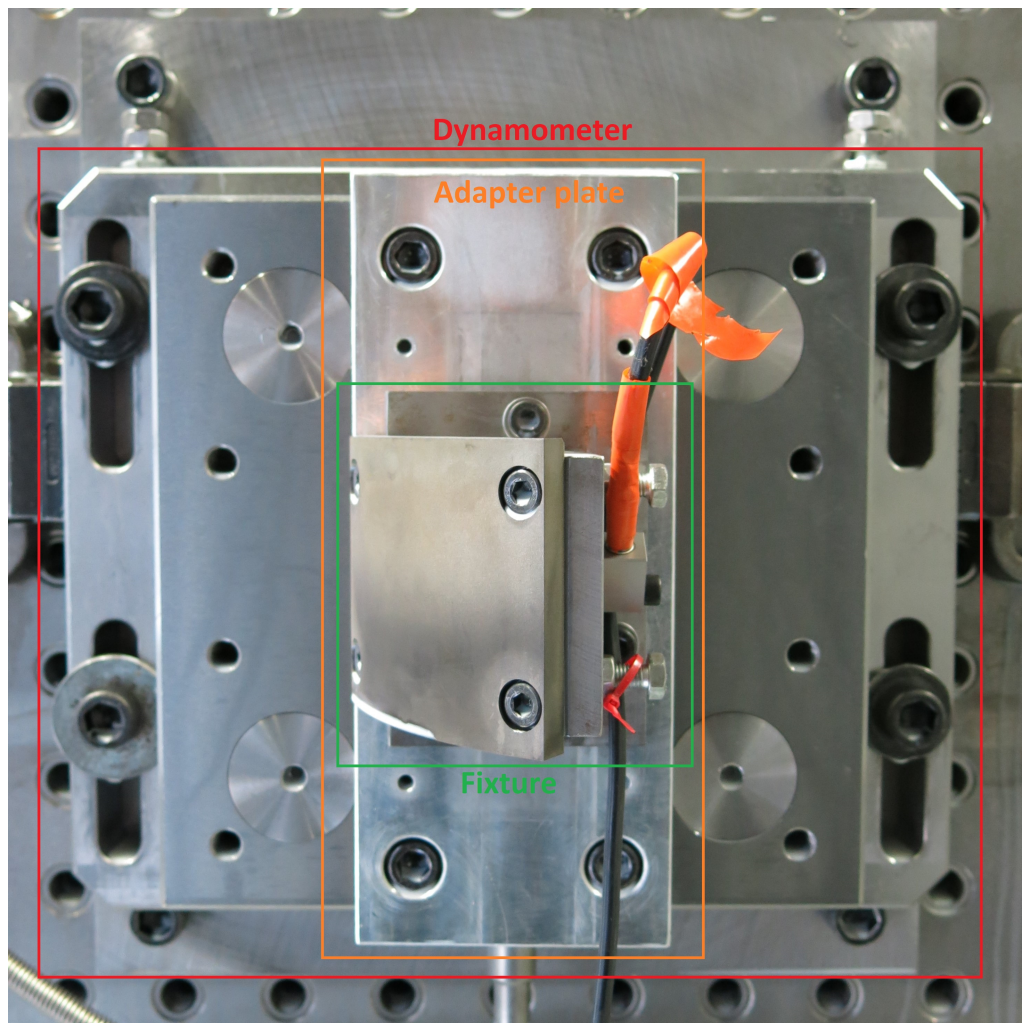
Example of dynamometer use, indicating fixture and adapter plate.
